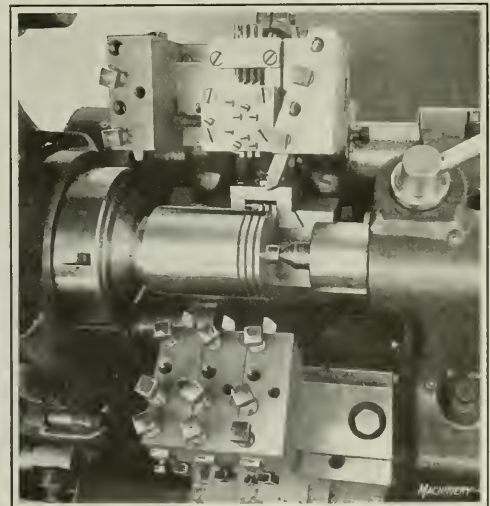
Close-up View of a Machine engaged in finishing a Cast-iron Piston
